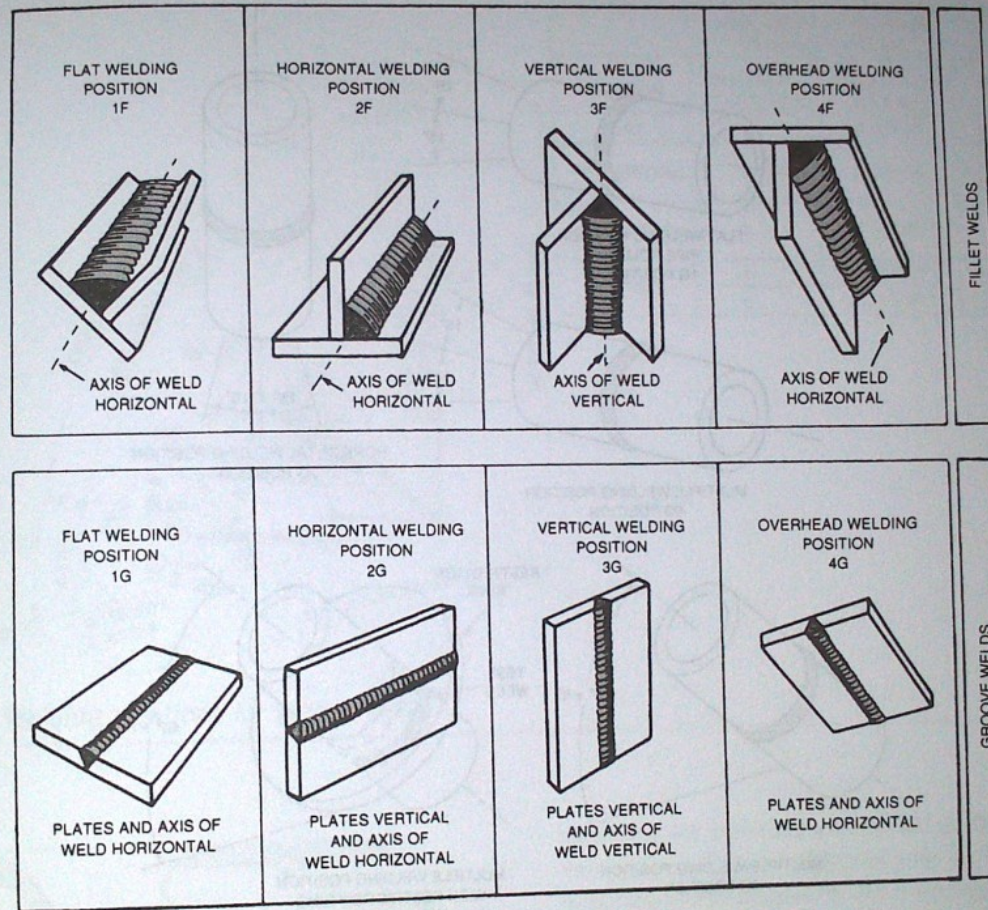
Welding positions for fillet and groove welds.
